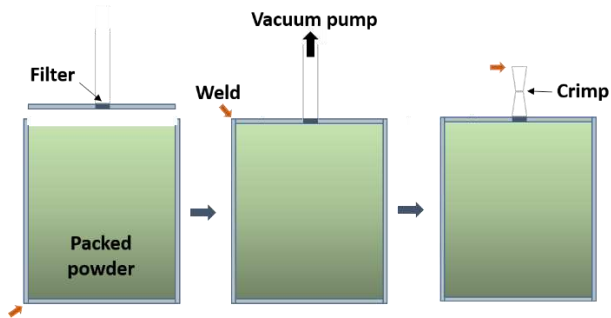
Schematic view of the canister packed powder and bake-out step [8].
